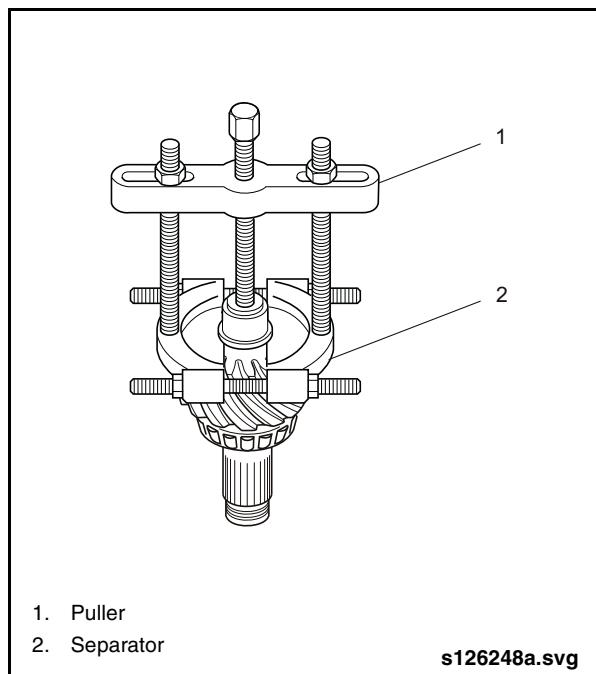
Removing Drive Pinion Inner Bearing Race
